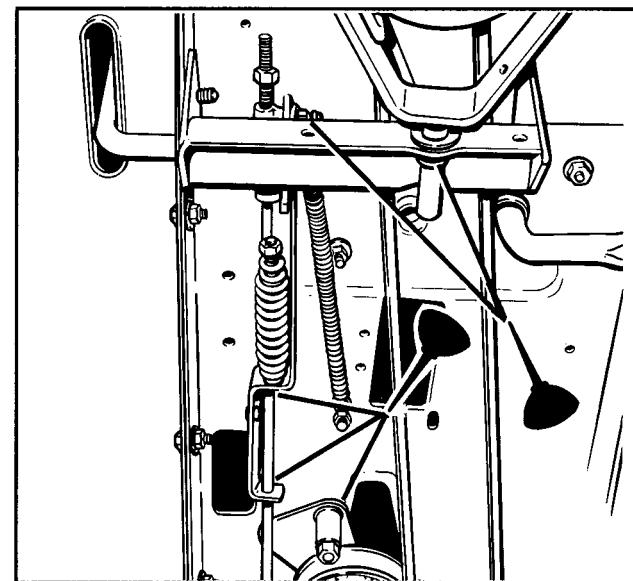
Clutch & Brake Rod Lubrication (Gear Model)
